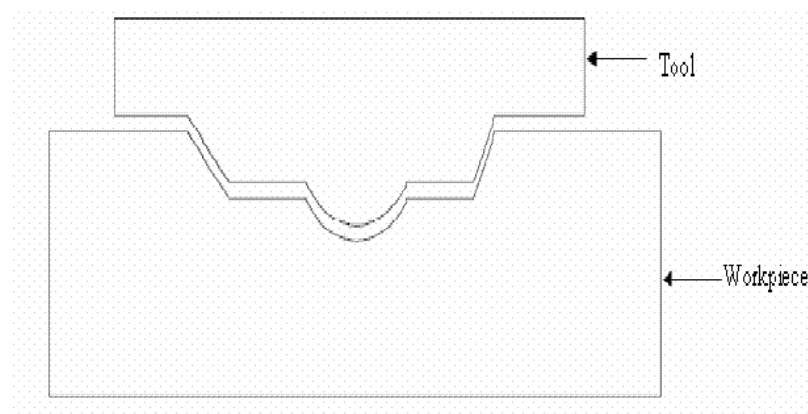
Tool shape and corresponding cavity formed on work piece after EDM Operation
